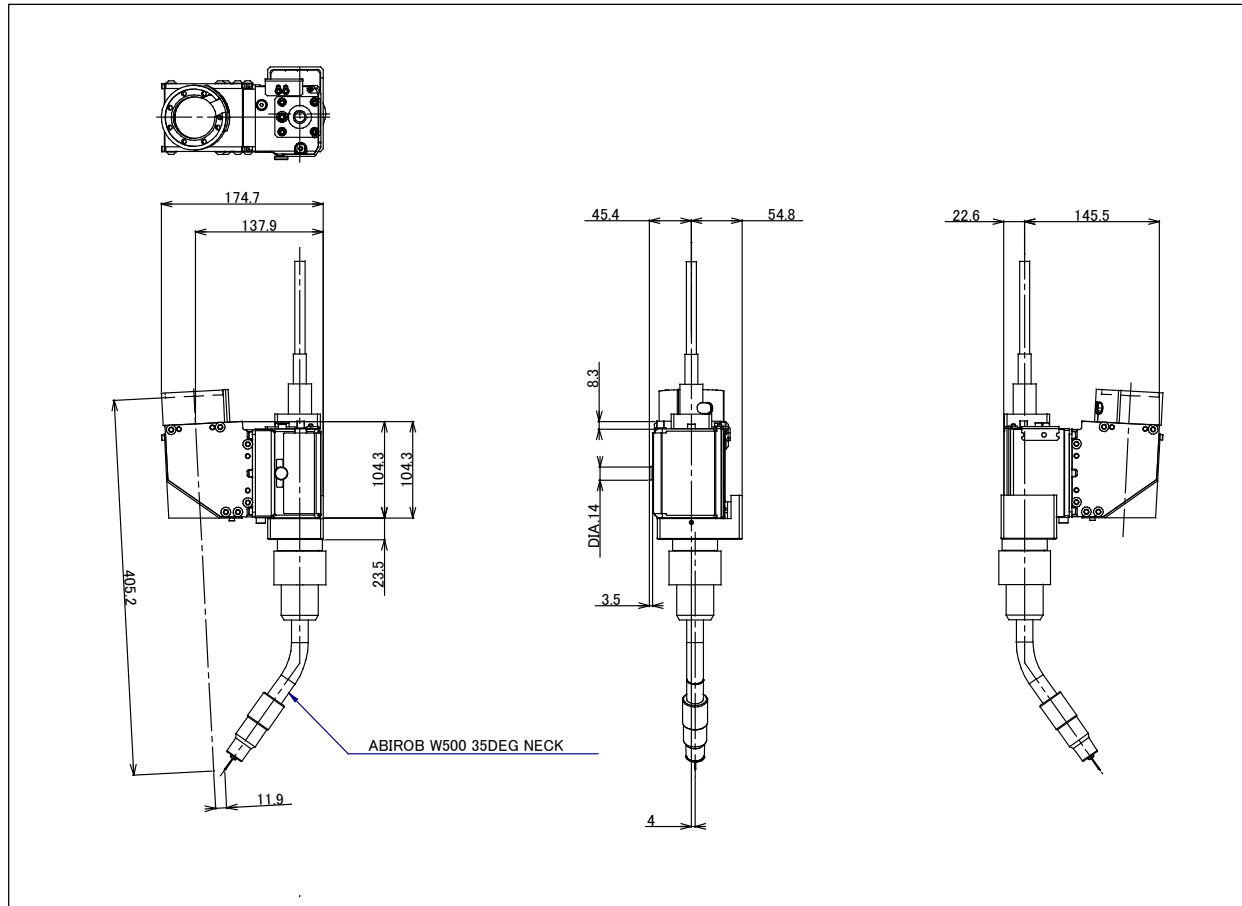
(a) External dimension (Servo torch for aluminum)
